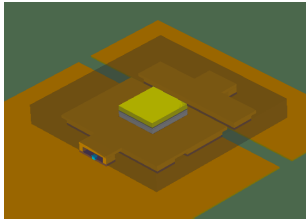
Ideal mounting position of a thermocouple for the OSLON® Black Flat
